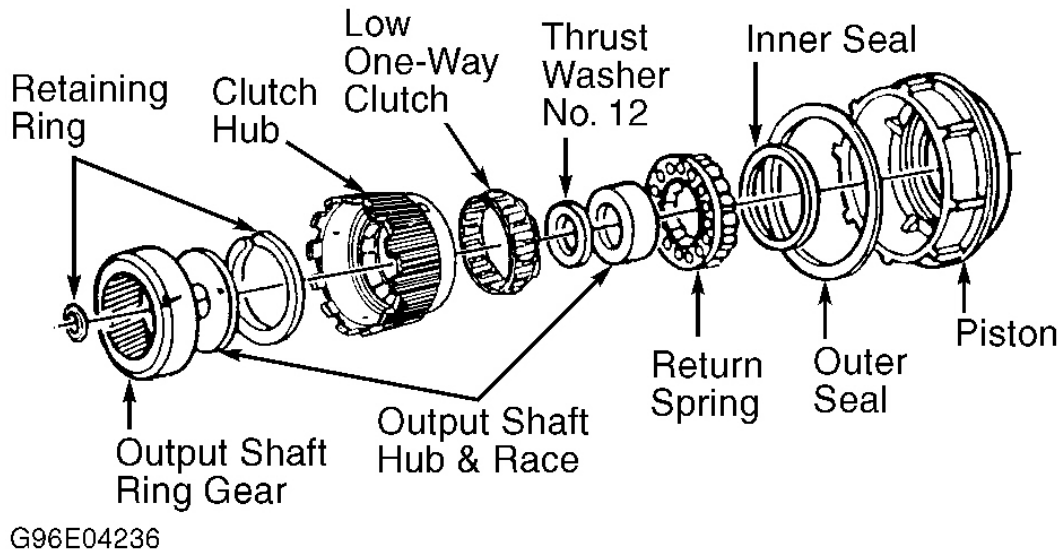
Exploded View Of Low-Reverse One-Way Clutch
